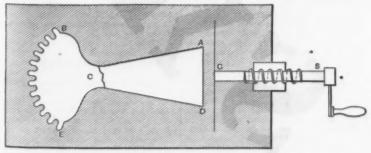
Sectional Plan, Showing Screw Arrangement to Prevent Shrinkage Cracks.
